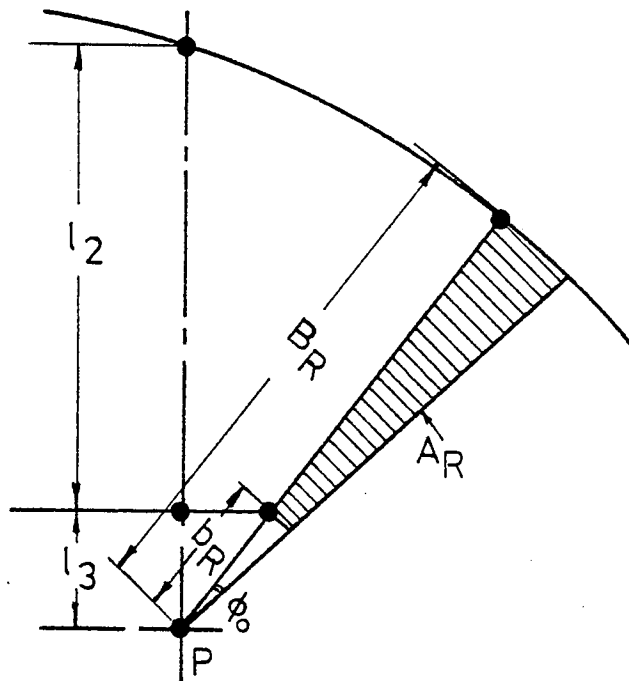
CHIP PRODUCED BY RIGHT SIDE EDGE
